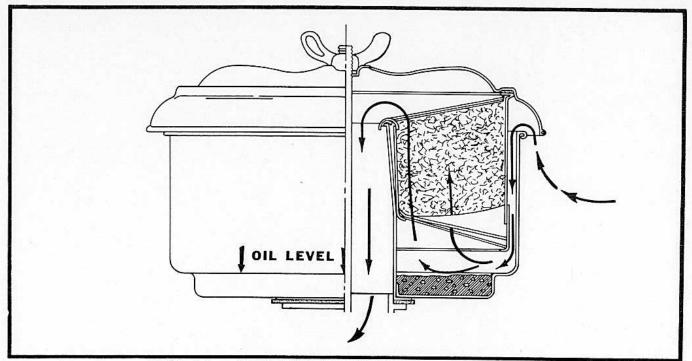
CUTAWAY VIEW OF A TYPICAL OIL BATH AIR CLEANER
